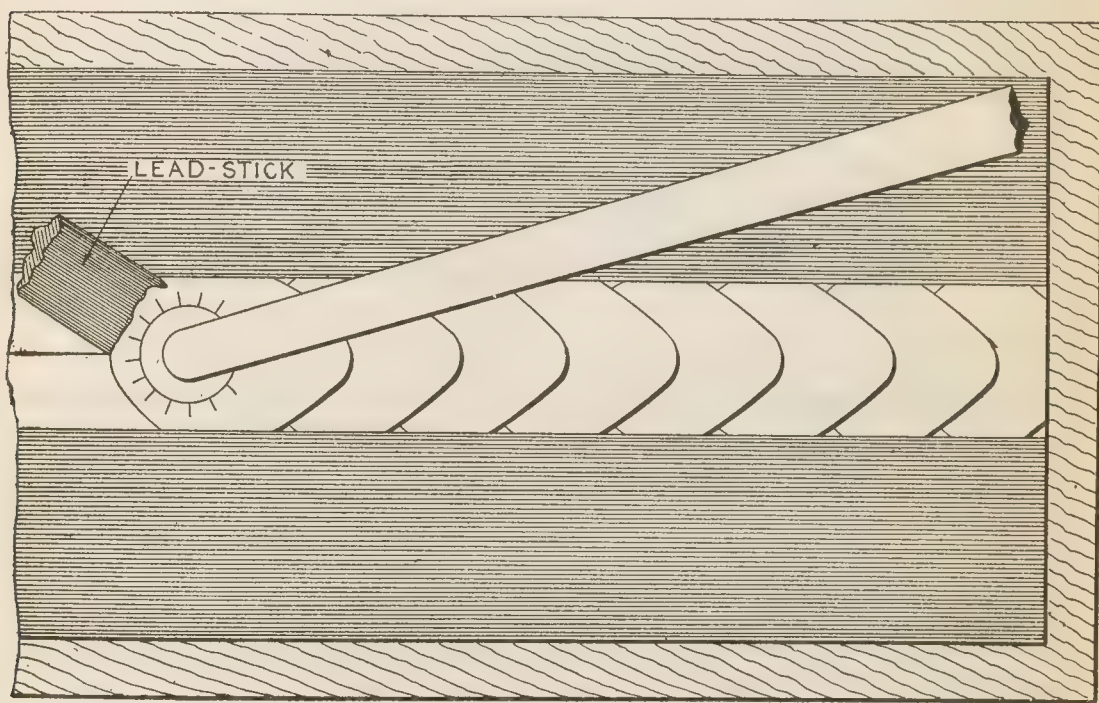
,991.—Process of burning a butt seam in two sheets of lead.
